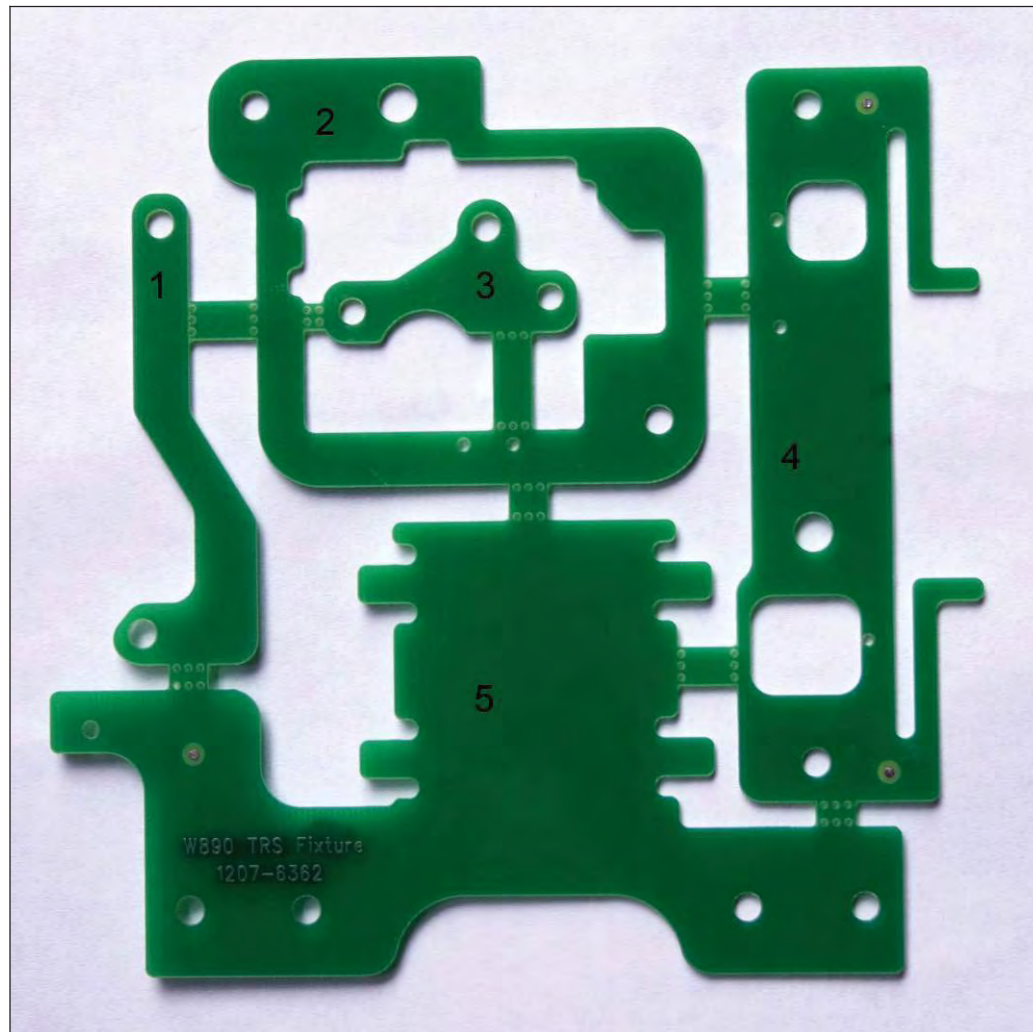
The spare parts of the thin mechanical parts kit KK1493. 1) Card holder, KK1493-3, 2) Keyboard clamping frame, KK1493-4, 3) RF Connector frame, KK1493-5, 4) Camera clamping frame, KK1493-1 and 5) Display holder, KK1493-2.
